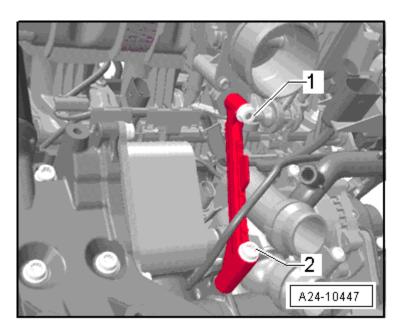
Identifying Intake Manifold Bracket Mounting Nut And Bolt
